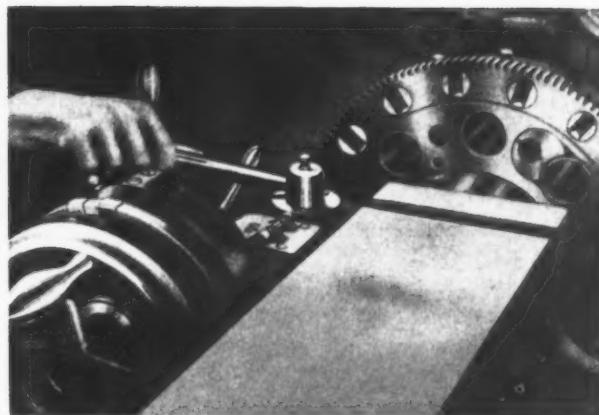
Operating Locking Pin which Enters Indexing Bushings near Rim of Indexing Plate
